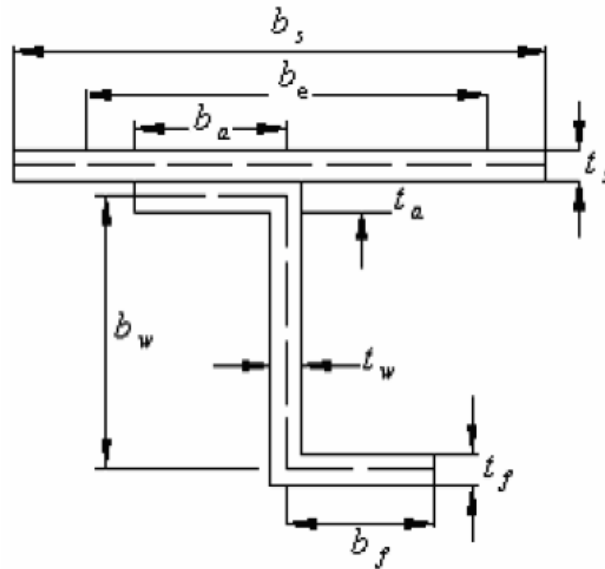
Panel geometry definition using 'Z' stringer [5]
